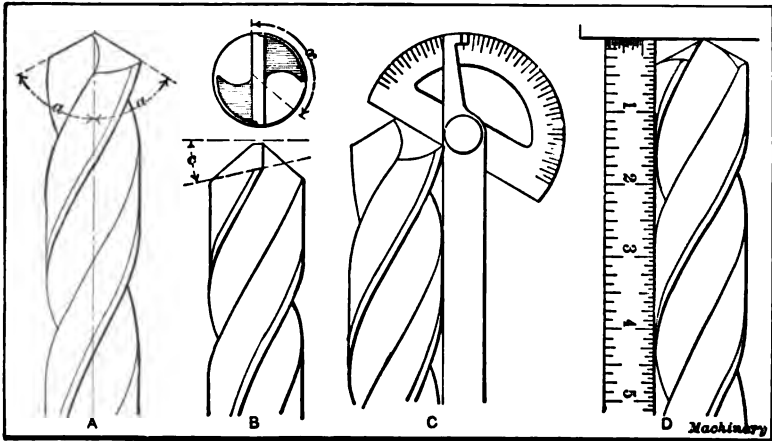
Views showing Angles to be Considered when Grinding Drills, and Methods of Measuring Lip Angle and Clearance
